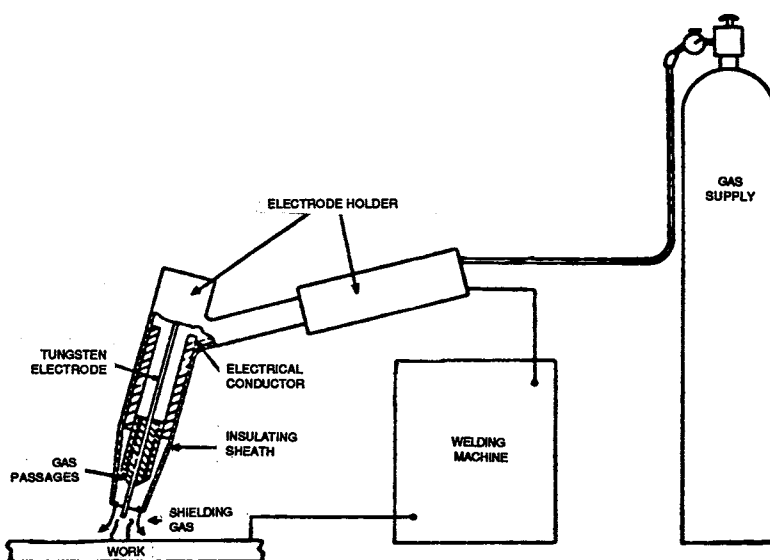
Schematic diagram of gas tungsten-arc welding
